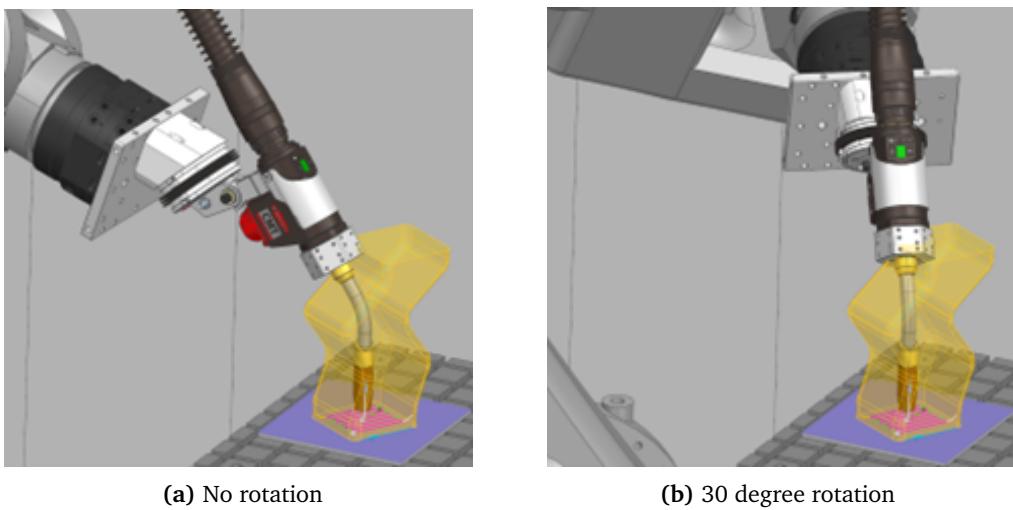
Rotation around the C-axis of a welding torch
